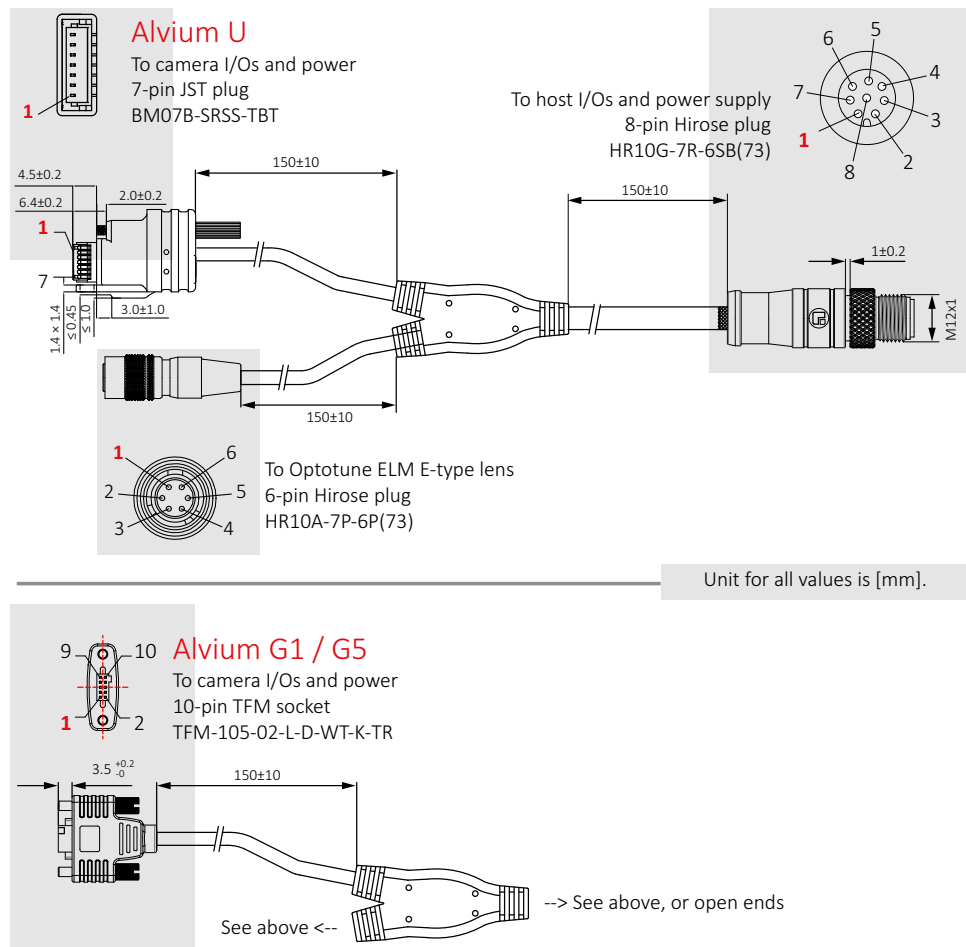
Lens connection cables for Alvium USB and GigE > Technical drawing
